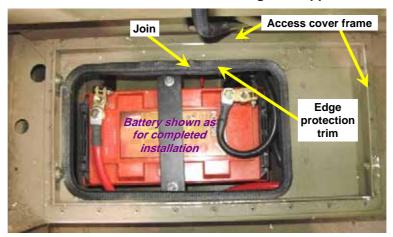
Top View of New Battery Access Opening with Edge Protection Trim Fitted
